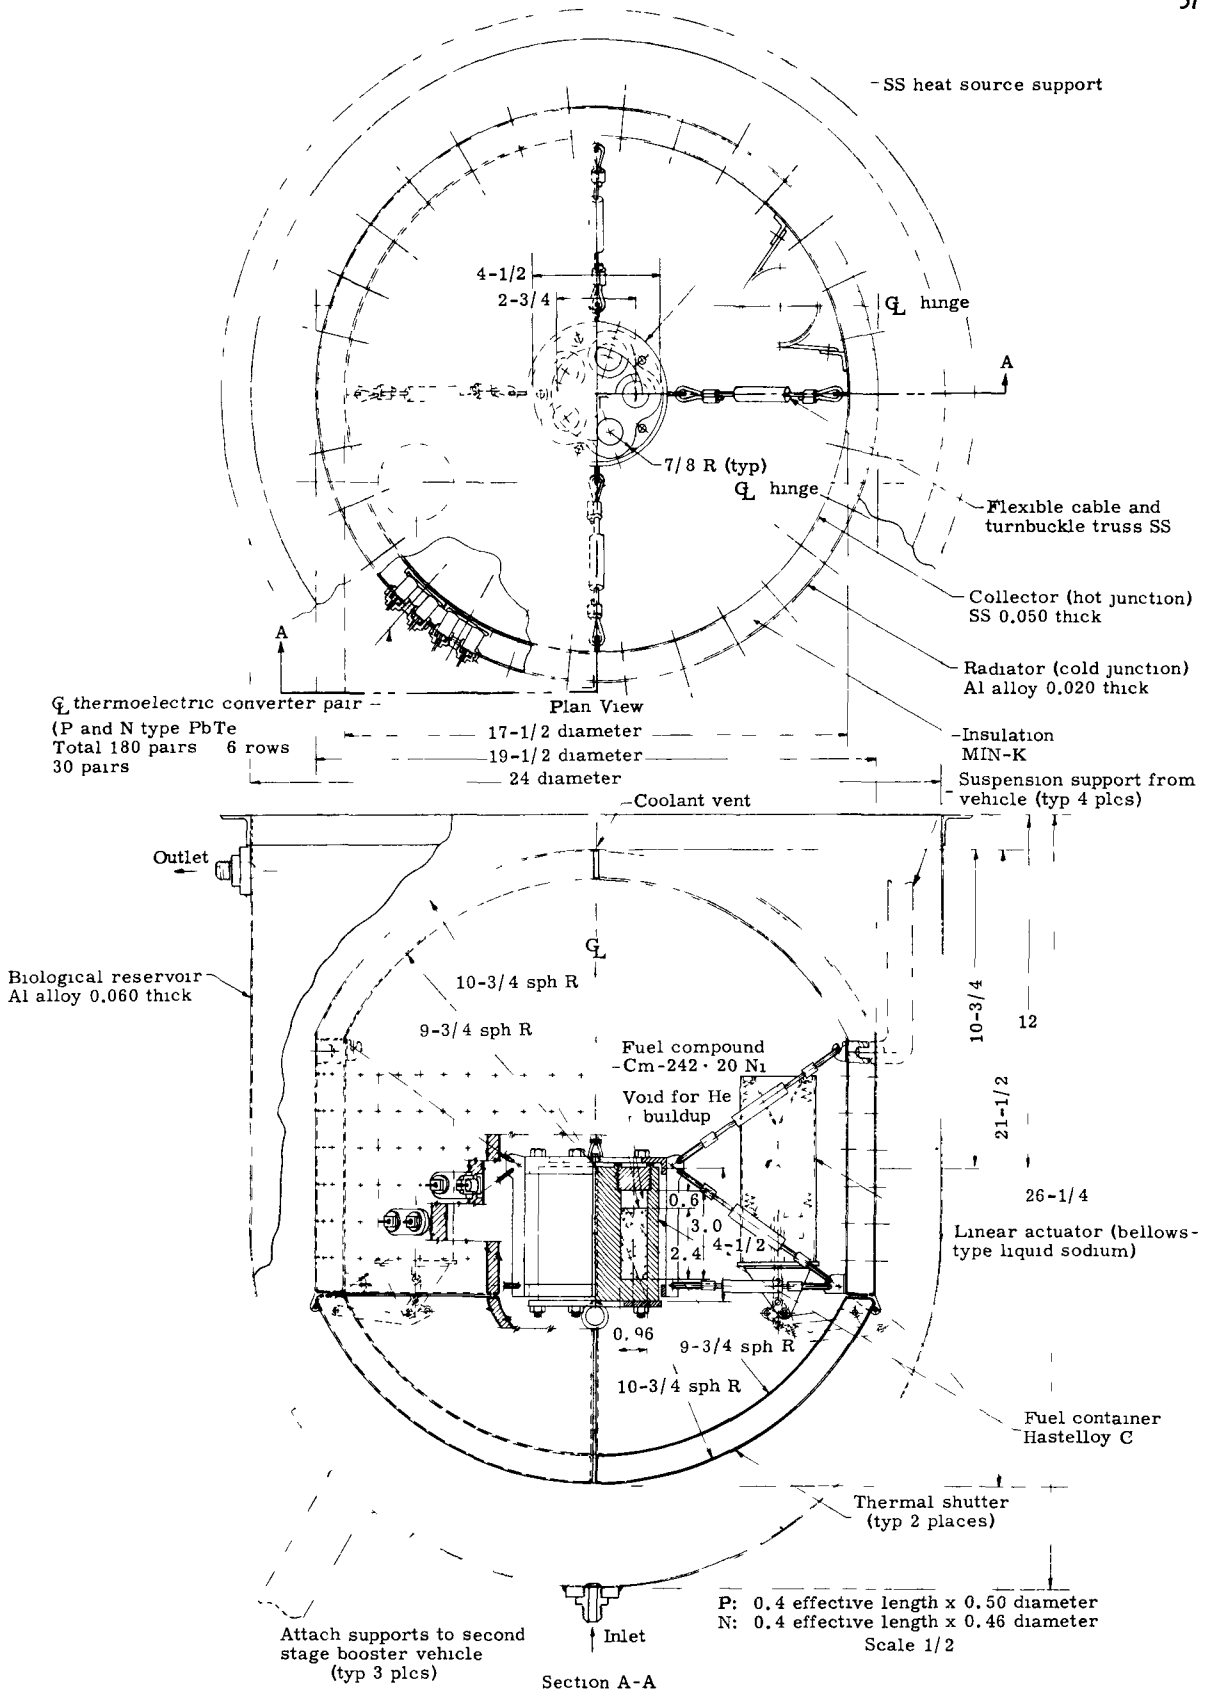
One-Hundred-Watt Generator--Final Design--Type C
